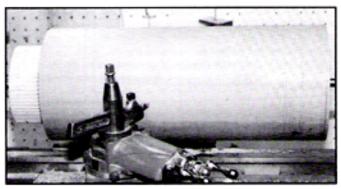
The fully assembled barrel with axles and gear must be turned in the lathe together to make sure they are true to one another.
